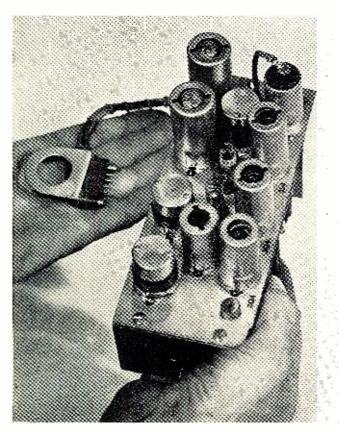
Bottom view of amplifier chassis showing use of tube shields. Tip jack in lower right is the Geiger tube input. A Winchester plug with attached handle makes electrical connection to case-mounted parts. See text on construction hints.
